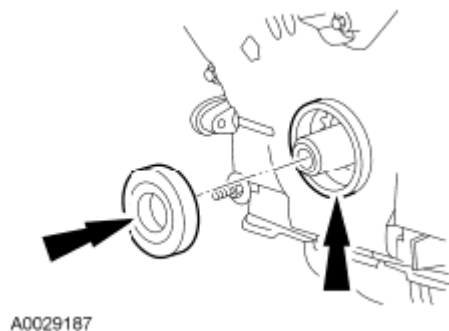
Locating Engine Front Cover And Crankshaft Seal Inner Lip
